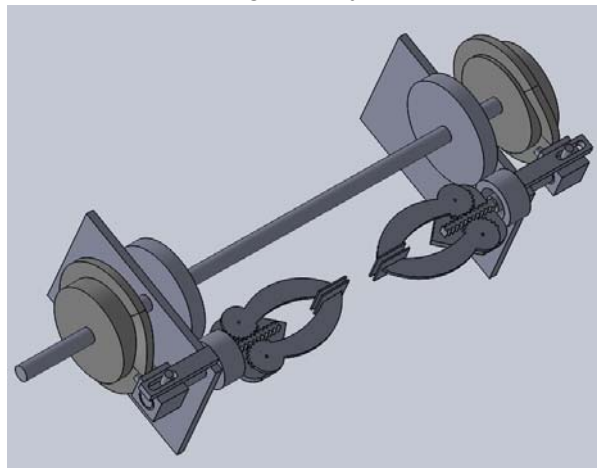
Claw subassembly of rack and pinion driven claws used to double wrap the candy.
